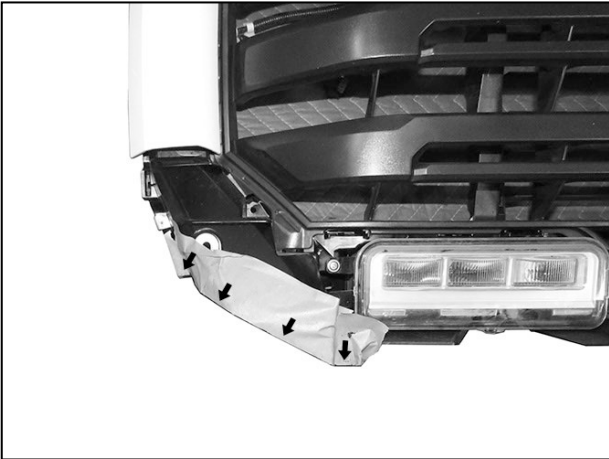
Place bumper fill panel onto grille. Use masking tape to make a diagonal guide line connecting cut on outer bumper end cover and center body panel. Cut along tape
